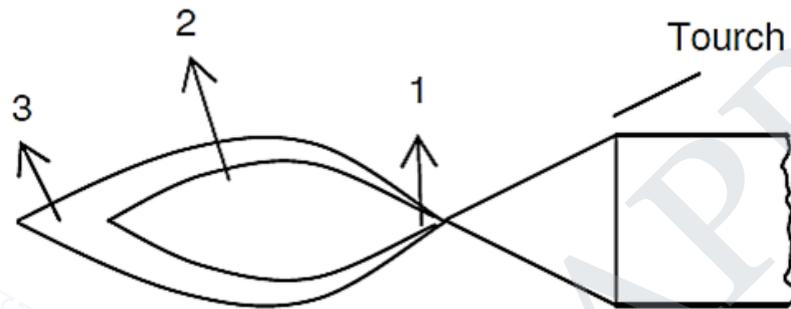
Flame establishment in oxy-acetylene welding
